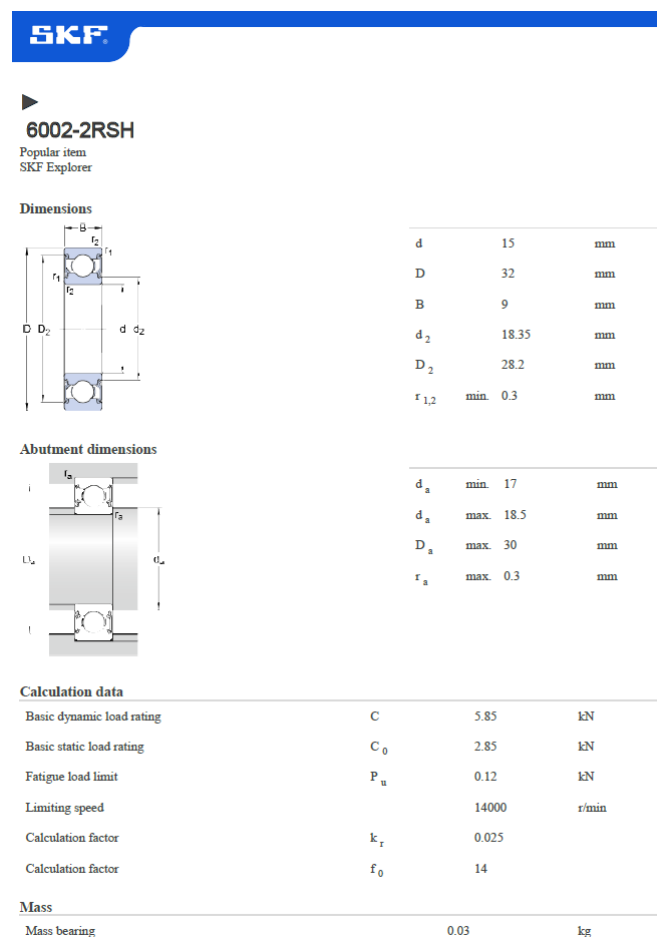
SKF deep groove ball bearing datasheet - 6002-2RSH.
